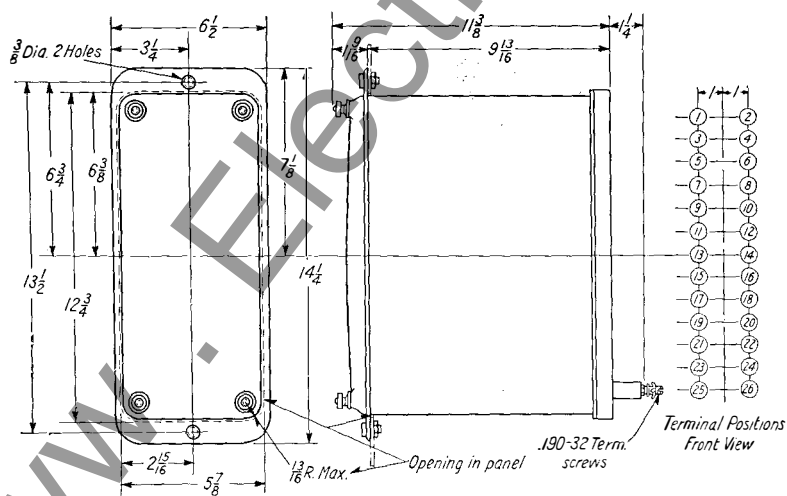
OUTLINE AND DRILLING PLAN, TYPE G-40 RECORDERS
